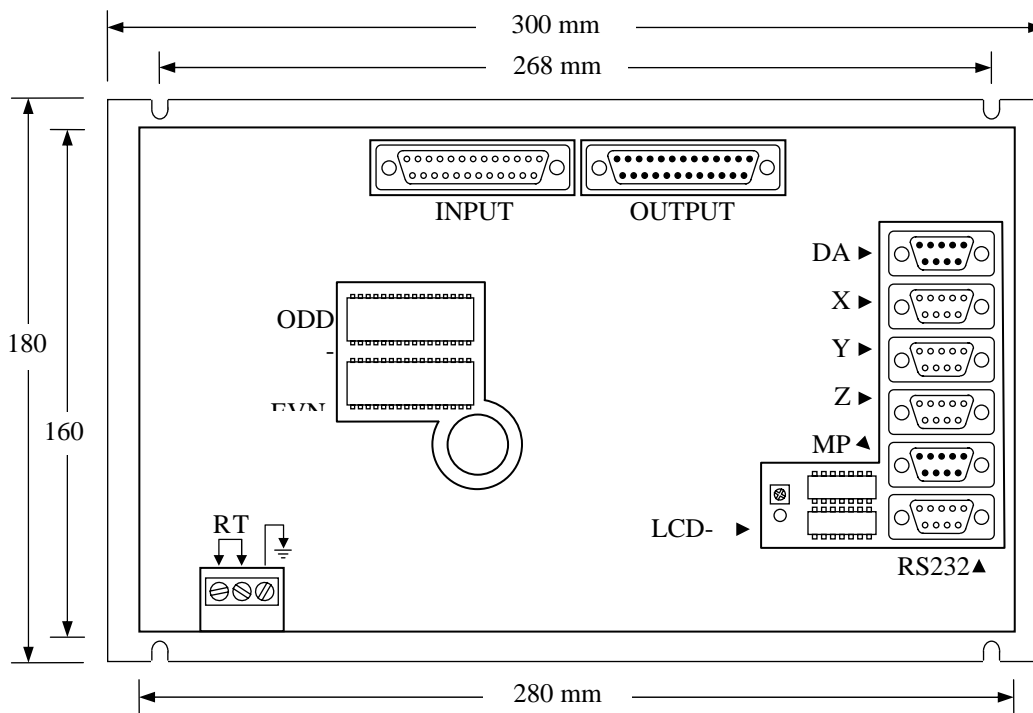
Dimension for HUST H2N Controller Box (Rearview)
